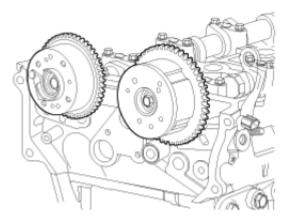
Identifying Intake & Exhaust CVVT Assembly Courtesy of HYUNDAI MOTOR CO.
